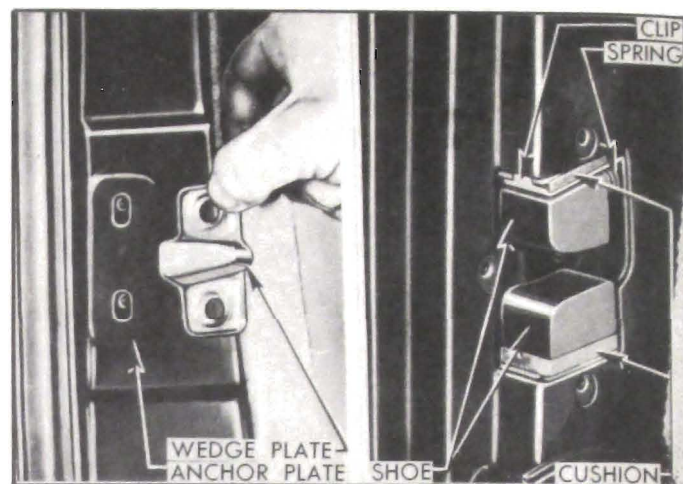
Wedge Plate and the Dovetail Bumper with Cap Removed—1948 Models
